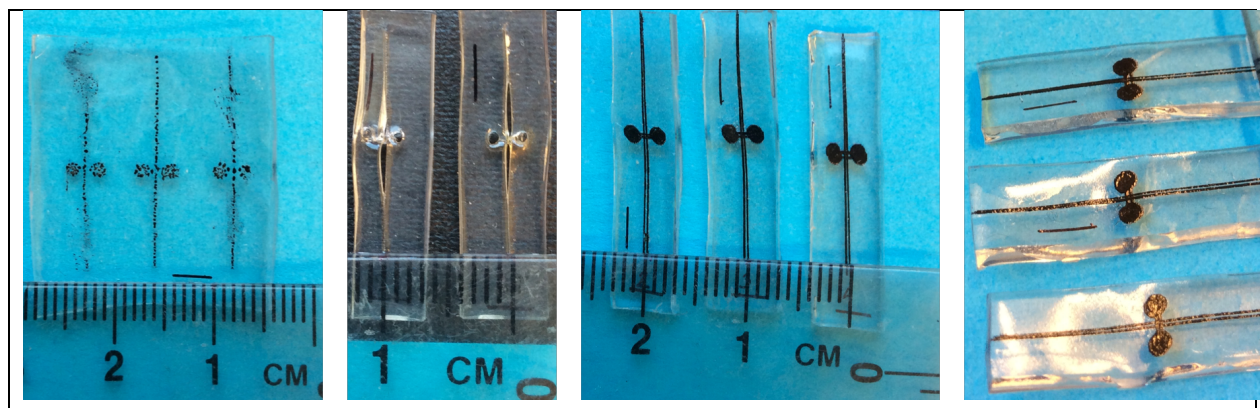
Polystyrene Shrinky Dink study, post heat treatment: dimensions and warpage (left to right: inkjet, laser cut, laserjet printing, laserjet printing)
